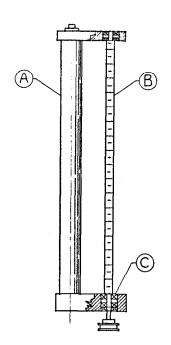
Typical elevator drive (three per unit). A: 2-in.-diam ball-bushing rod; B: lead screw; C: thrust bearing.
